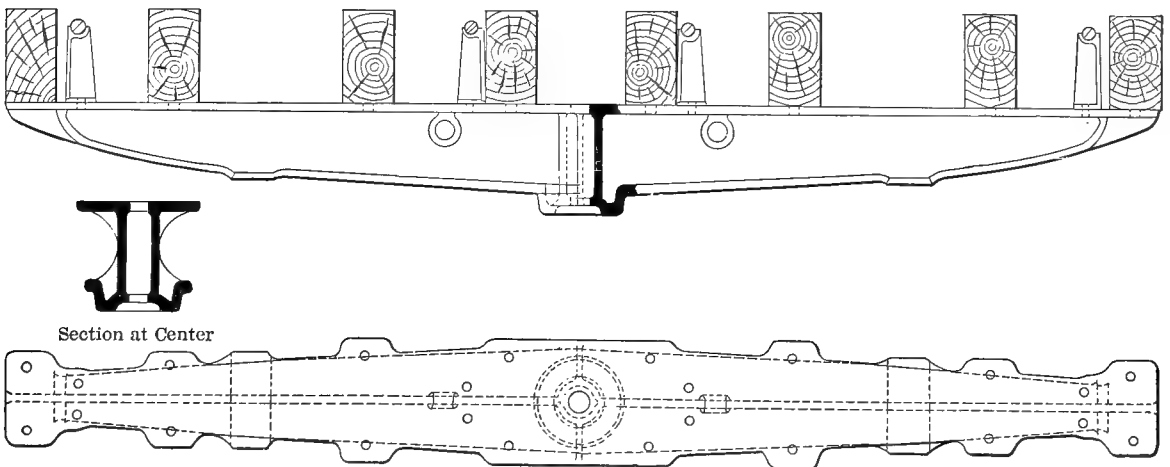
Cast Steel I-Section Body Bolster. American Steel Foundries.
